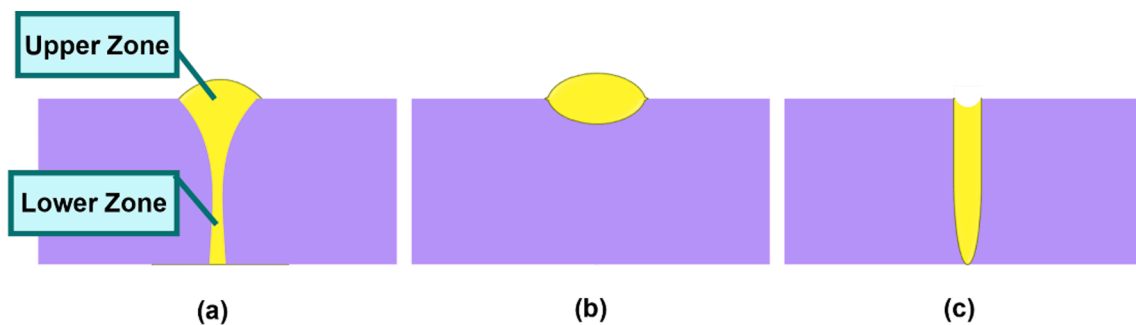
Configuration of a) hybrid laser-arc welding, b) arc welding, and c) laser welding.
